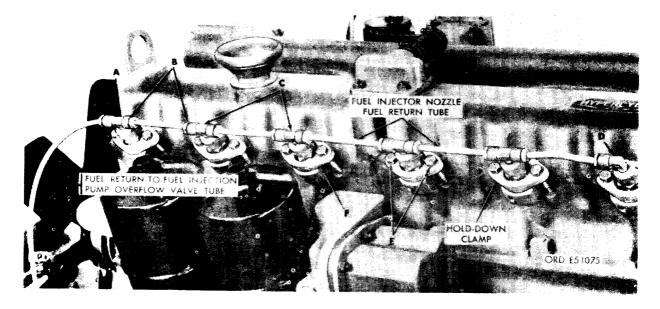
REMOVING INJECTOR NOZZLE FUEL RETURN TUBES AND NOZZLE AND HOLDER ASSEMBLY HOLD-DOWN CLAMPS.
